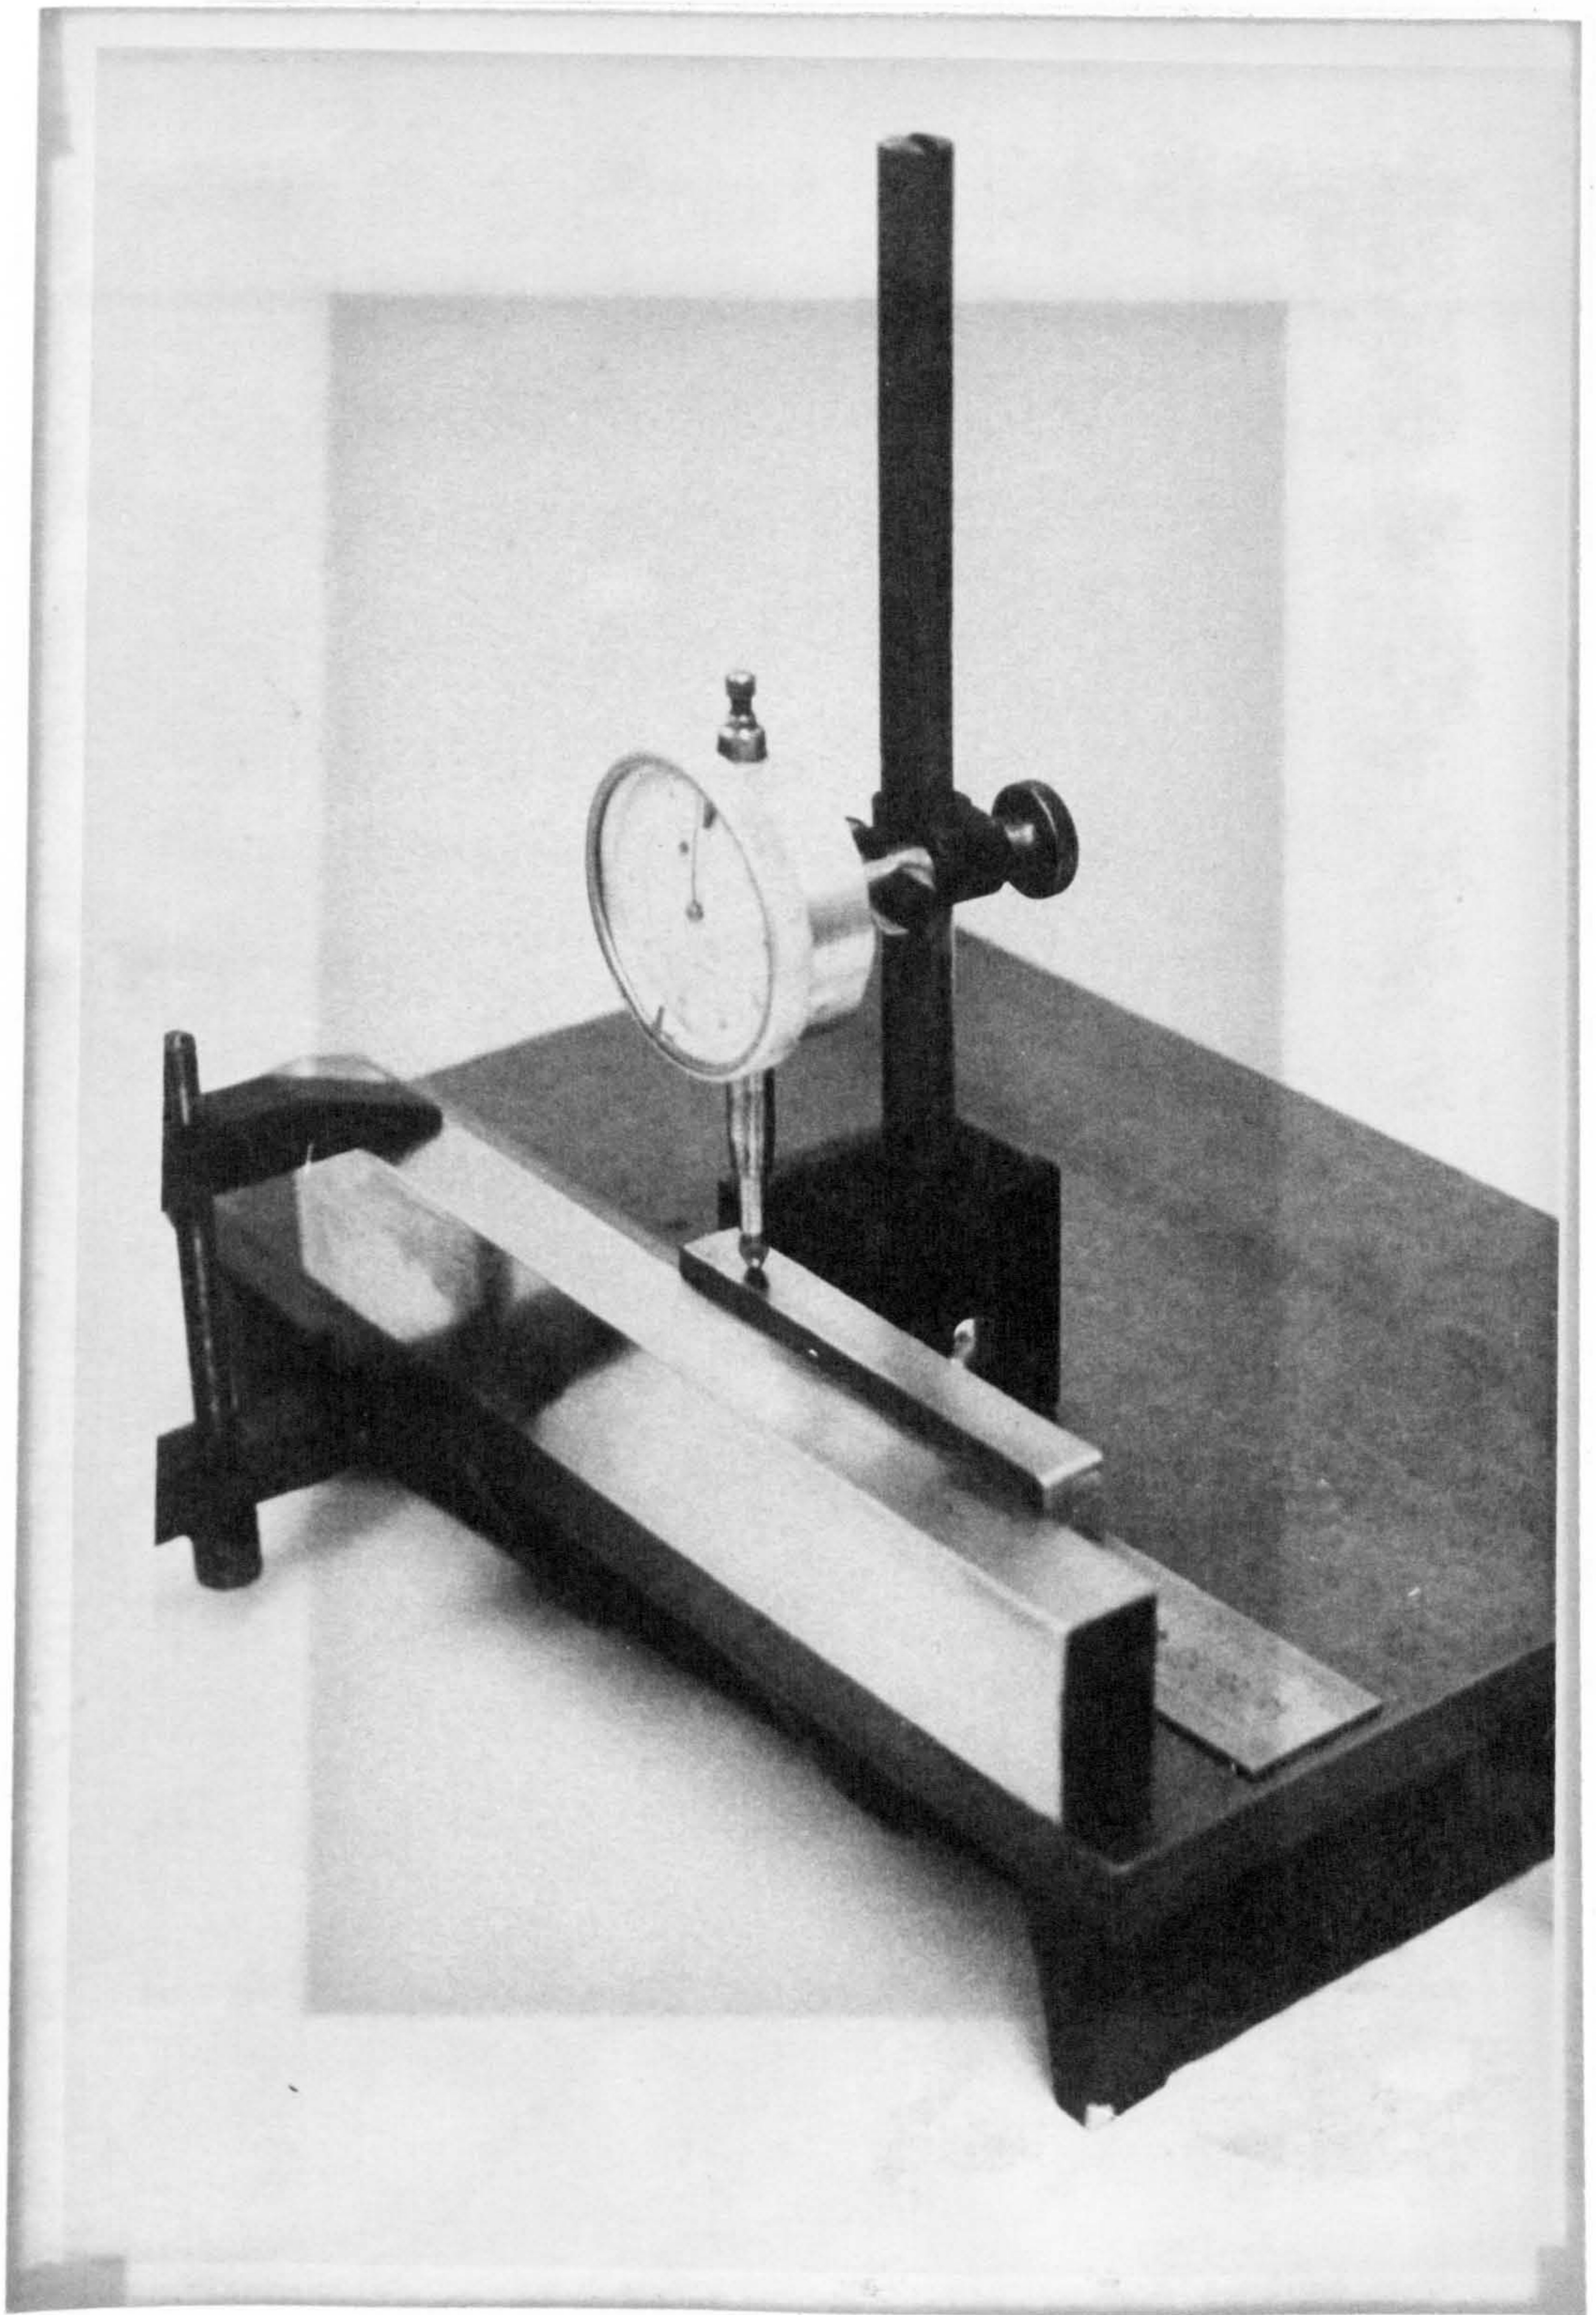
WORKPIECE PROFILE MEASUREMENT JIG
